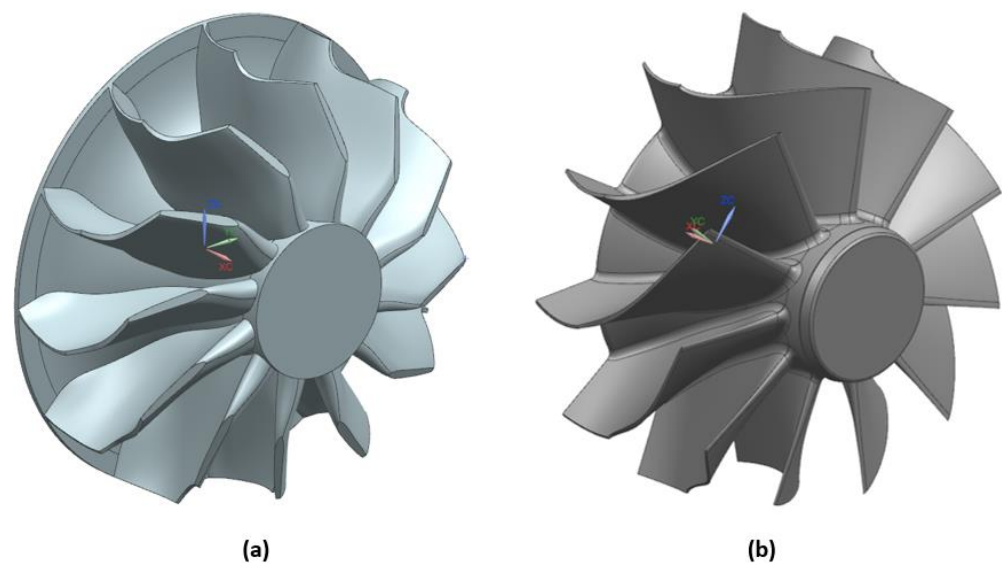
The geometries of (a) Rotor A—older version of turbine wheel and (b) Rotor B—latest version of turbine wheel (scaled to match the diameter of the Rotor A).
